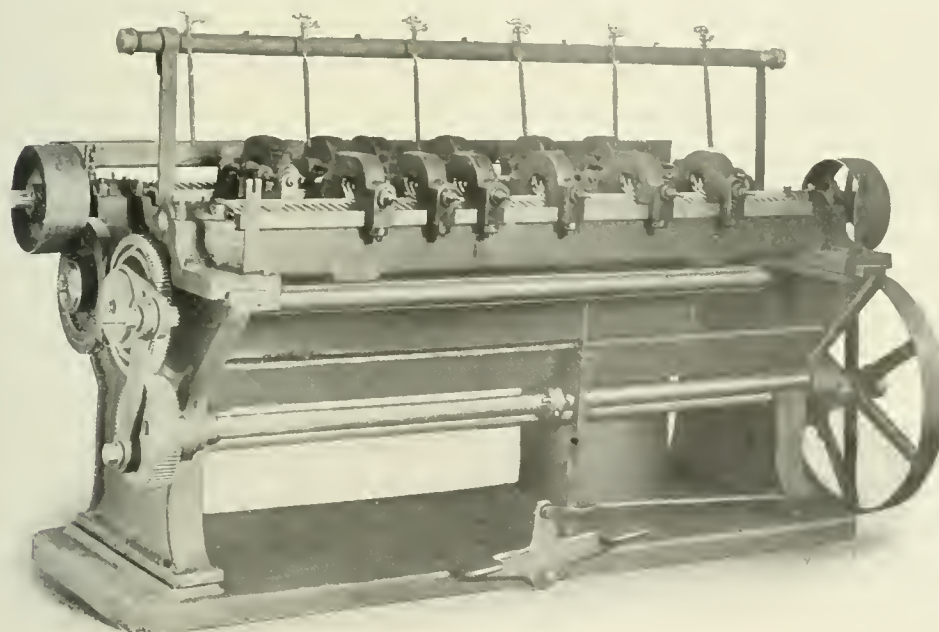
Multiple-spindle Duplex Pipe and Bar Drilling Machine, built by the Moline Tool Co.
